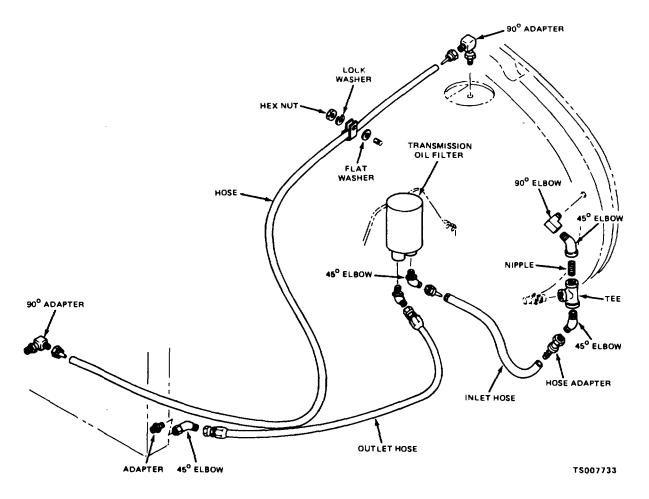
Transmission Oil Filter, Lines and Fittings, Removal and Installation
